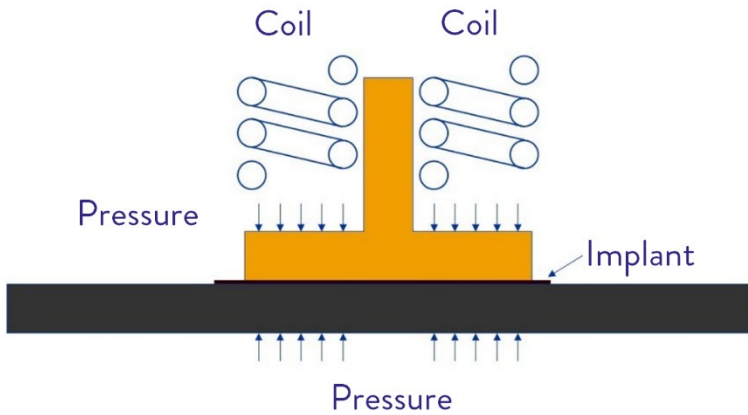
Induction welding process schematic; T-stiffener welded to a skin
